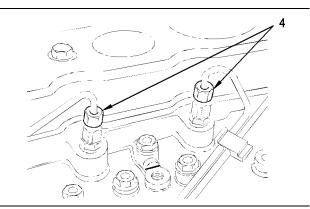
Fuel injection nozzles in the cylinder head (4) Flare nut
